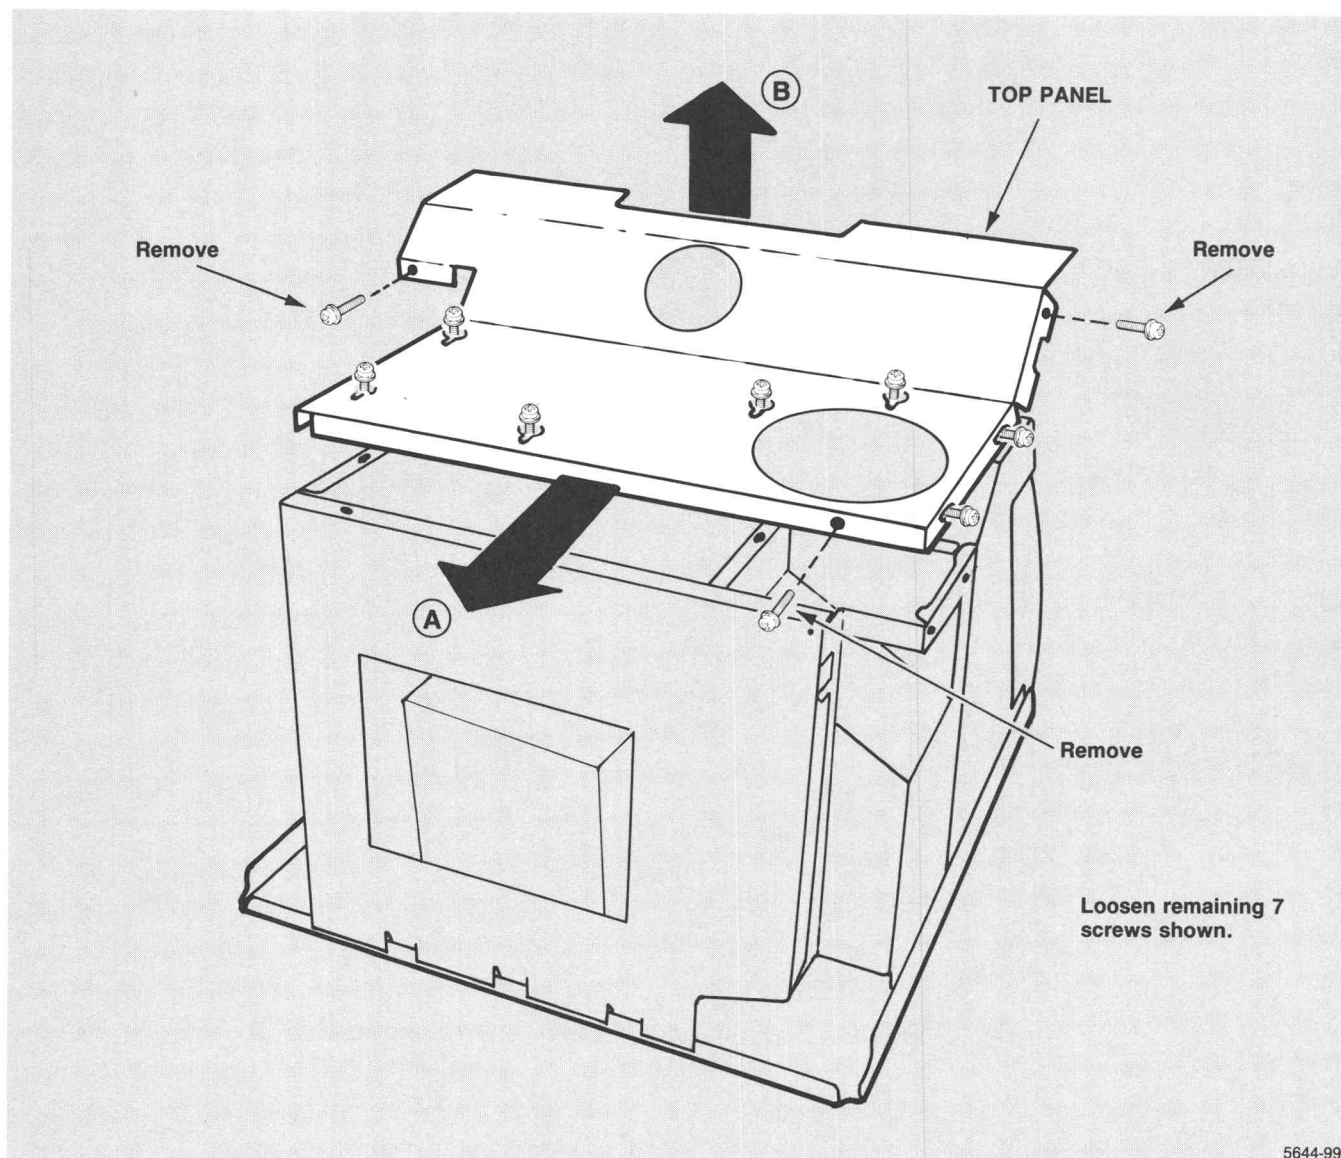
Removal of Fan Assembly (119-2387-00).
